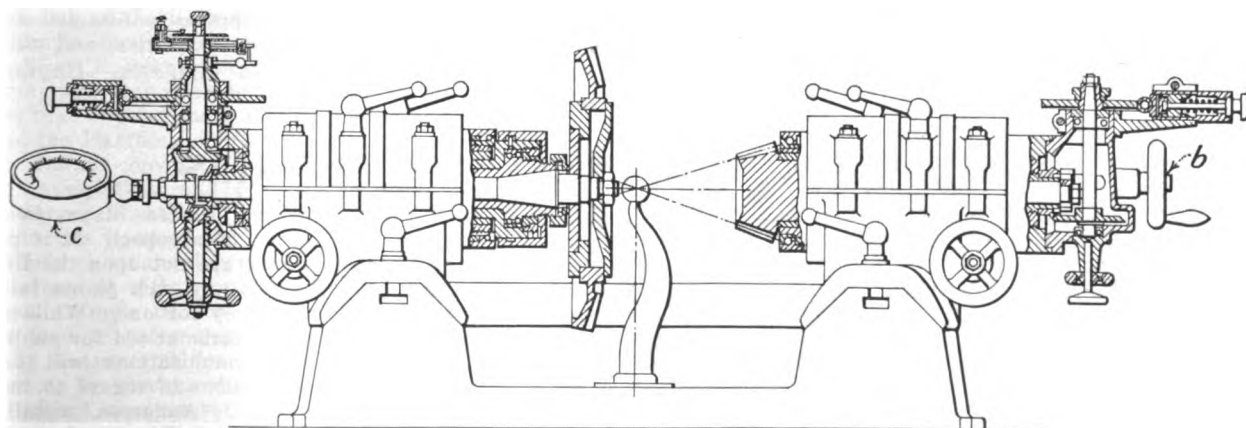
ELEVATION PARTLY IN SECTION OF THE MACHINE
